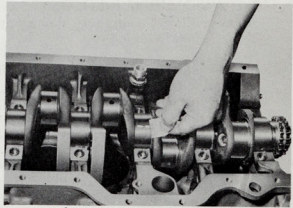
Measuring Crankshaft Oil Clearance W9112
